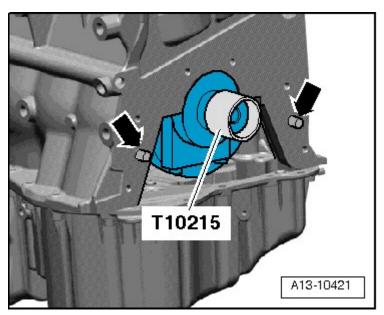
Sealing Flange Onto Guide Pins On Cylinder Block Using Assembly Tool T10215 Courtesy of AUDI OF AMERICA, LLC
